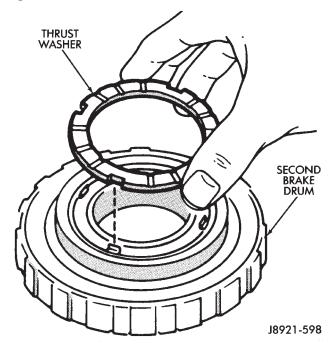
Removing/Installing Second Brake Drum Thrust Washer
